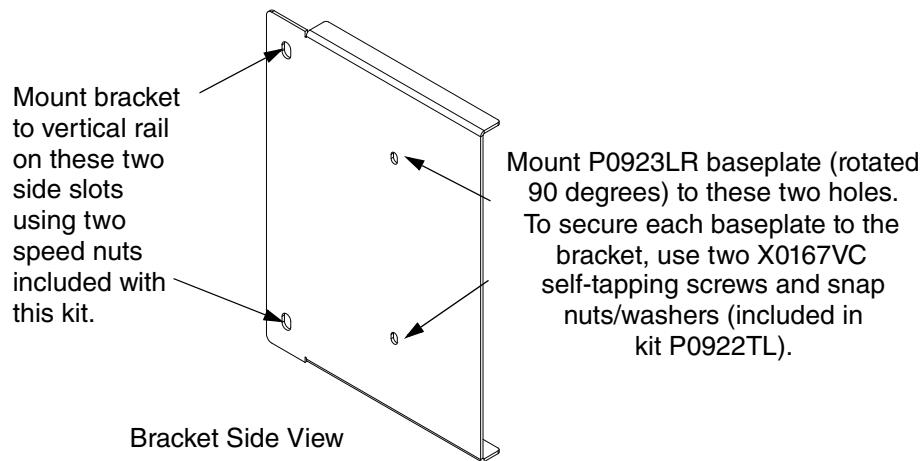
Baseplate Mounting Bracket for One Baseplate (Kit P0922TL Shown)
